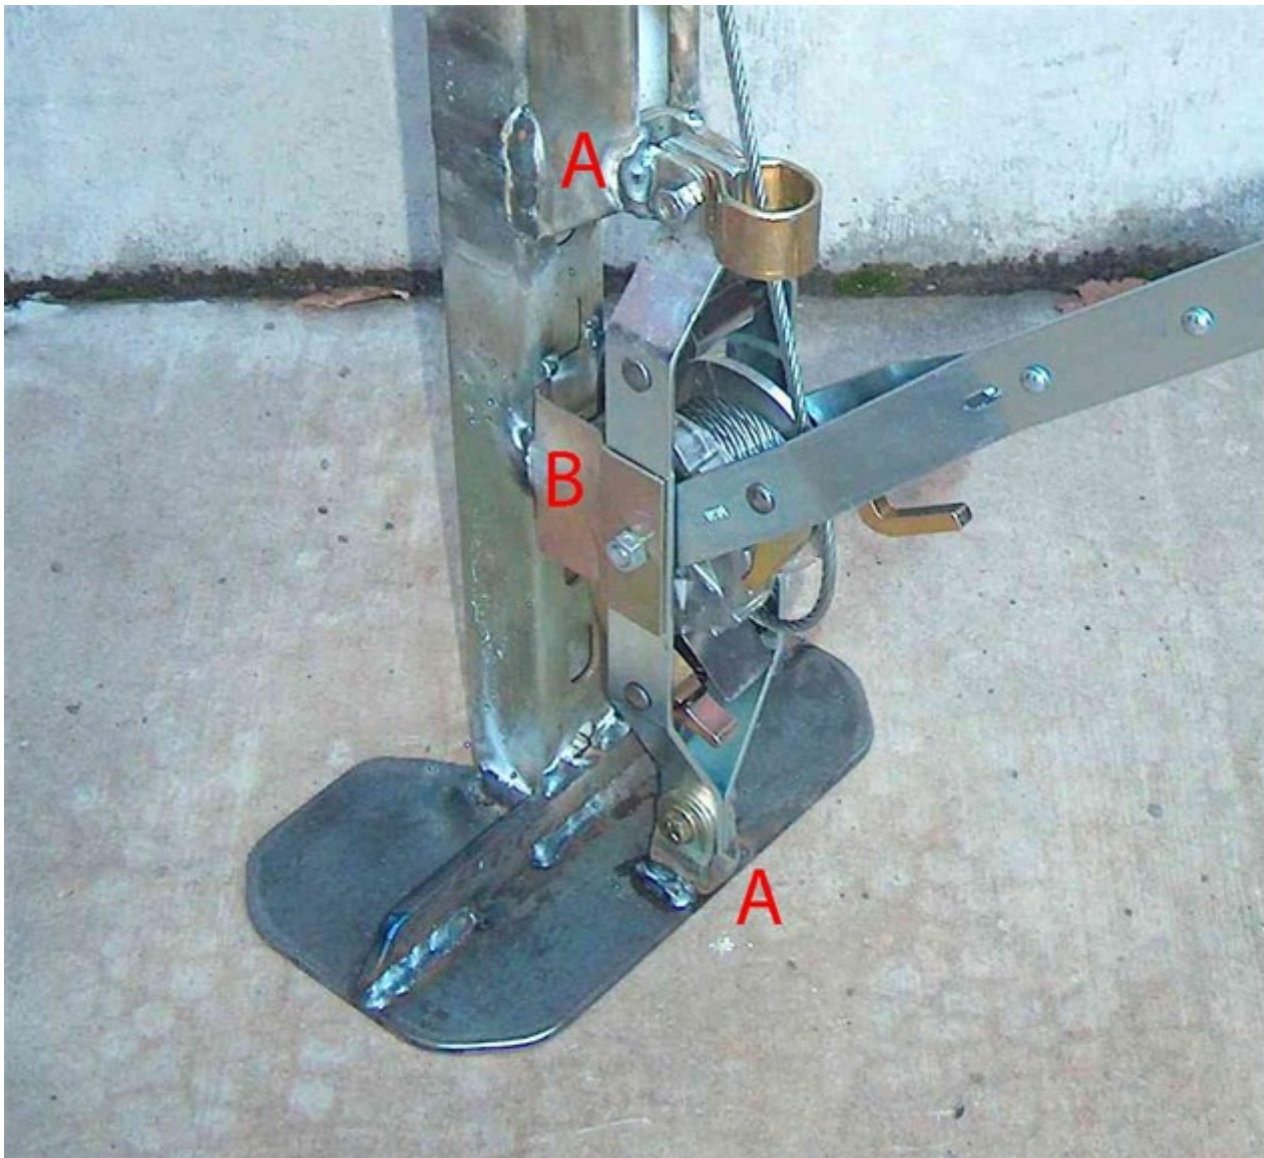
Foot detail showing ratchet winch attachment detail. The brackets for mounting the winch (A) are made from cutting the winch hook swivels apart. The “C” shaped shell is welded to the puller frame (B) for additional stability. Note the winch cable assembly was installed after welding.
